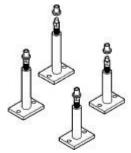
Post Kit Engine Cradle 6848 Courtesy of CHRYSLER LLC
